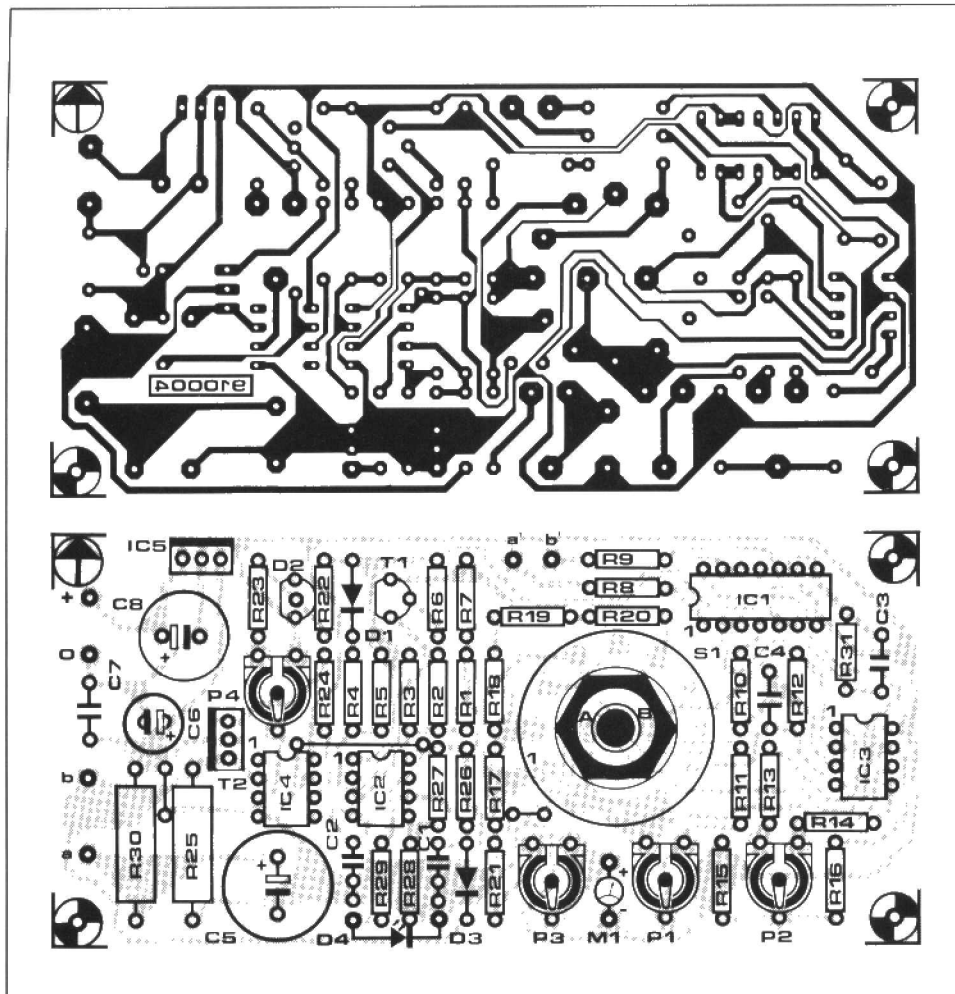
Single-sided printed-circuit board for the milliohmmeter. Note that the range switches are fitted direct onto the PCB.
